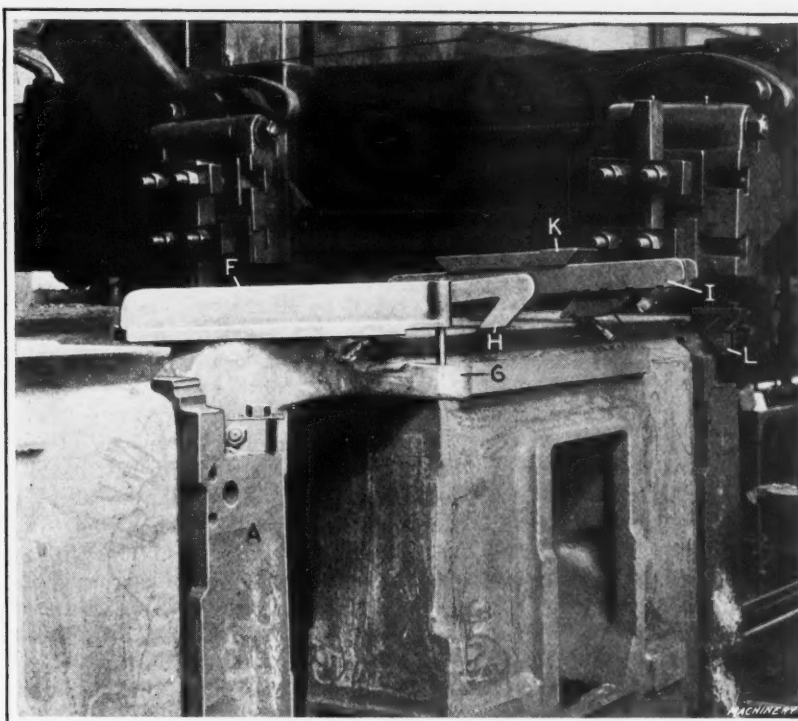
Close-up View of One Casting, Cutting Tools and Gages for testing Work planed on the Machine illustrated in Fig. 1
